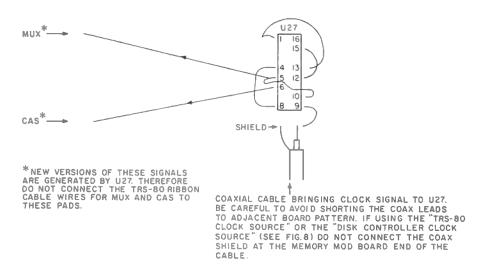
Detail connections for U27. The coaxial cable brings clock signal to U27. Avoid shorting the coax leads to adjacent board pattern. If using the TRS-80 or disk controller clock source (see Fig. 7), do not connect the coax shield at the memory mod board end of the cable.
